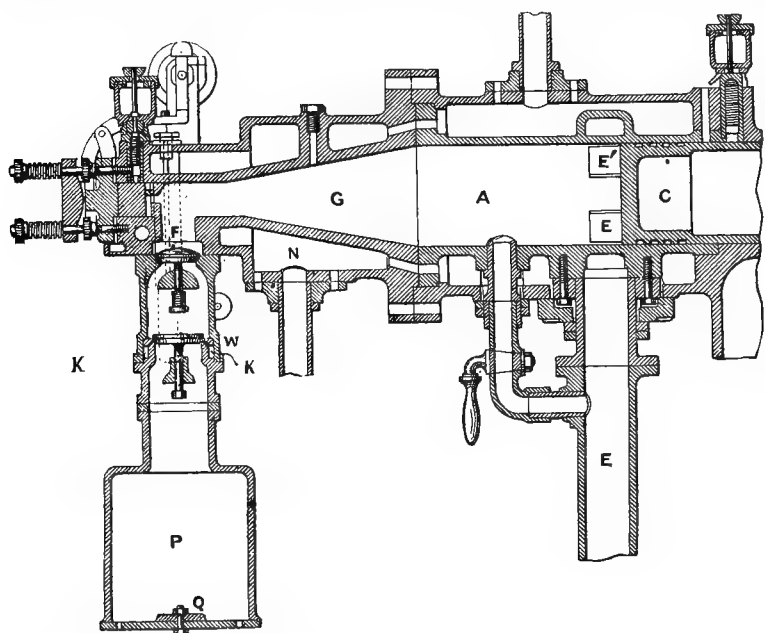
Longitudinal Section of Clerk Gas Engine
